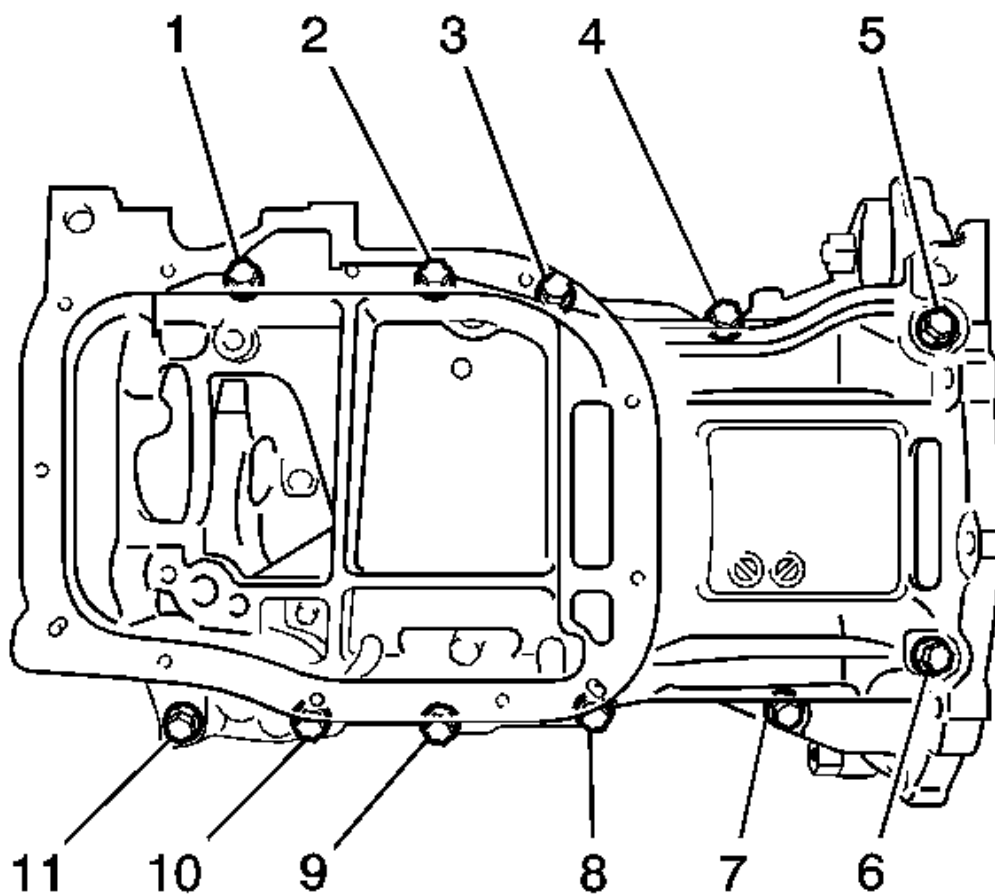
Identifying Upper Oil Pan Bolt Loosening Sequence
